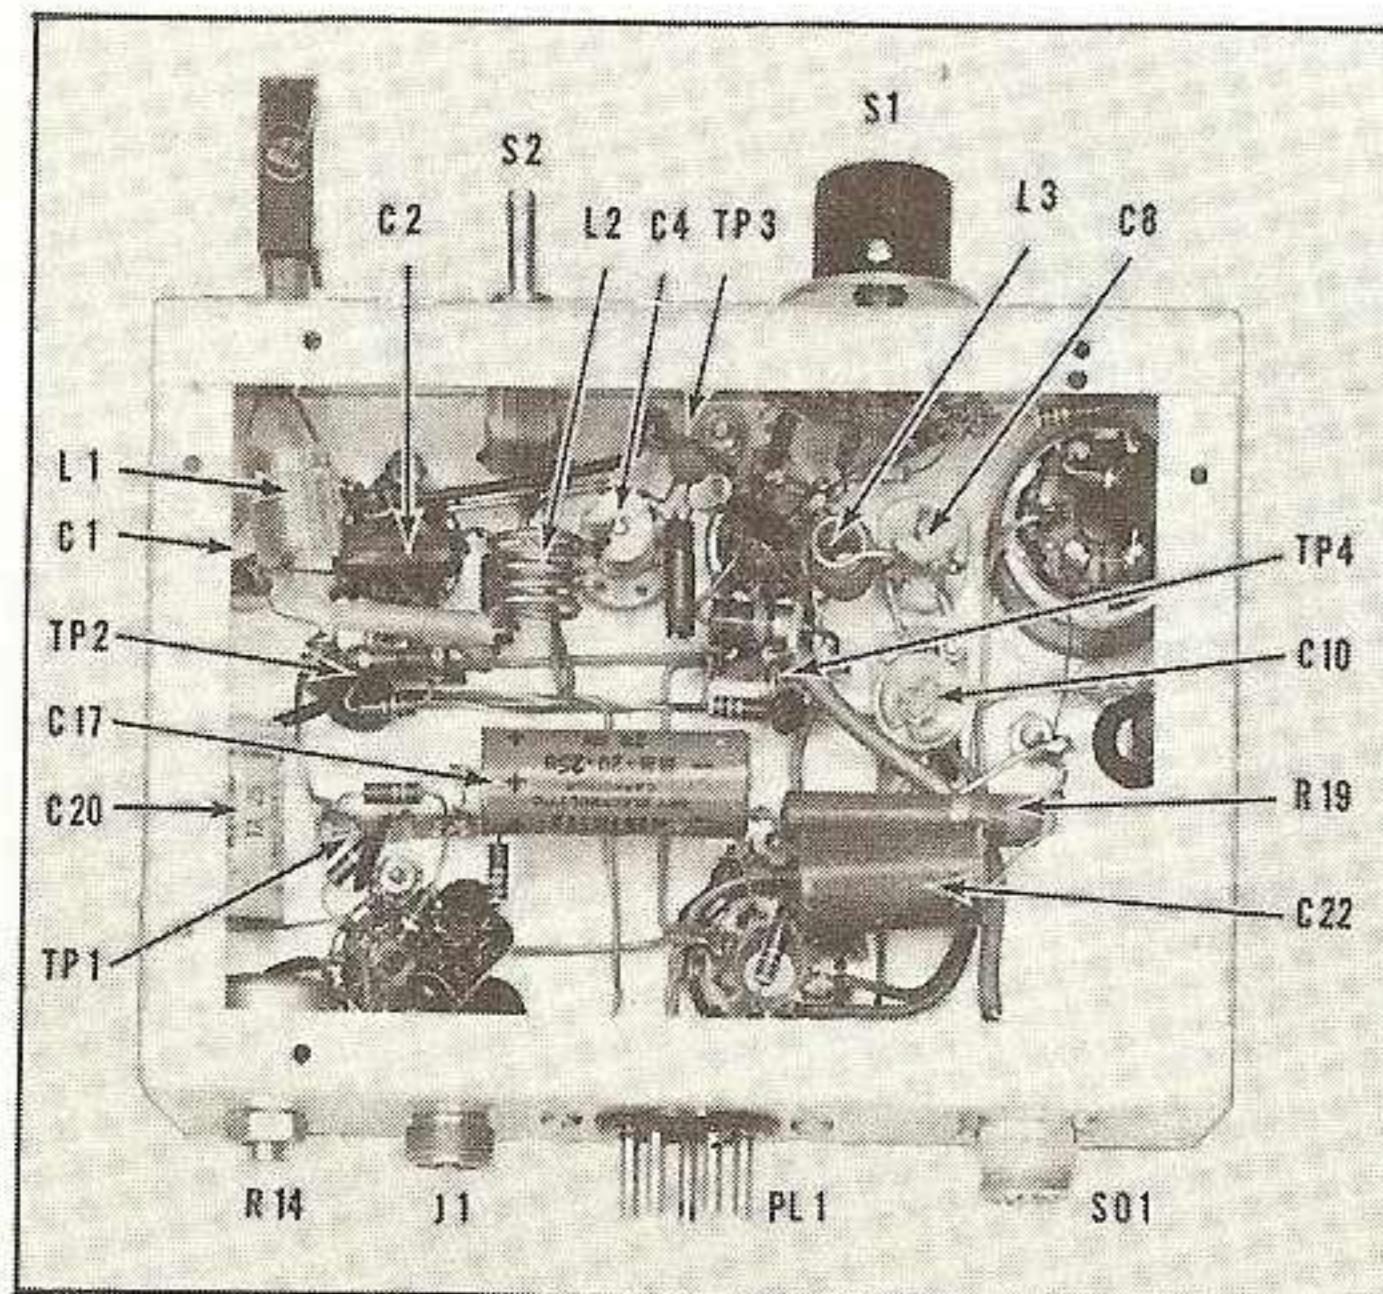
Under-chassis view of 2N6 transmitter. "Magic eye" socket is at right, with the r-f amplifier plate circuit components to the left. The audio components are along the rear edge of the chassis.
